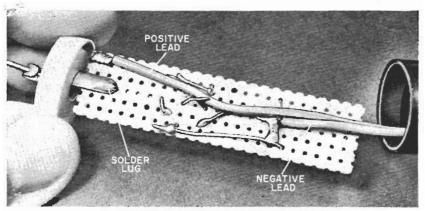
The underside of the probe board showing the two power connections, and the solder lug that connects to the probe through cover mounted hardware.
